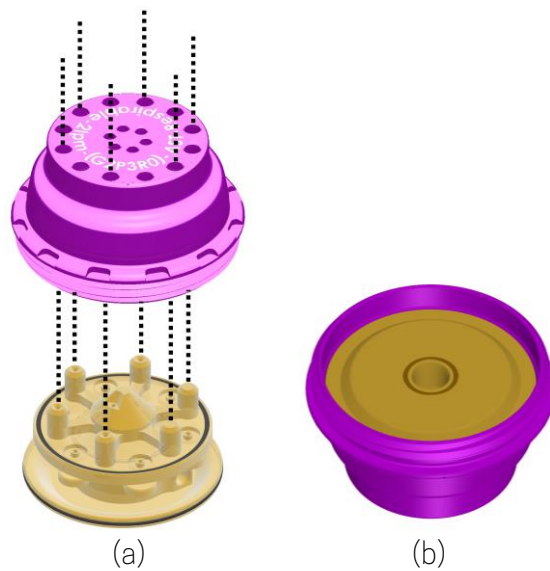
(a) When reinserting the GEN2 Respirable 2 L min^{-1} inlet inserts into the cap, align the raised columns on the upper portion of the insert with the holes in the cap. (b) When the inlet is assembled correctly, the lower insert flange will sit below the bottom edge of the cap as shown.
